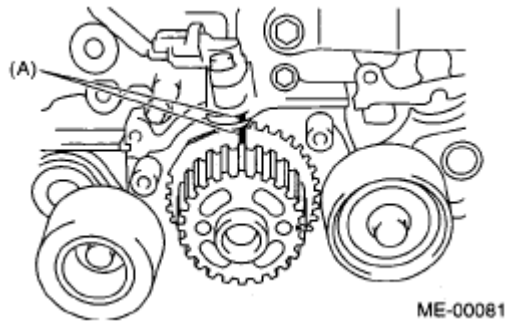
Identifying Mark On Crank Sprocket With Oil Pump Cover
